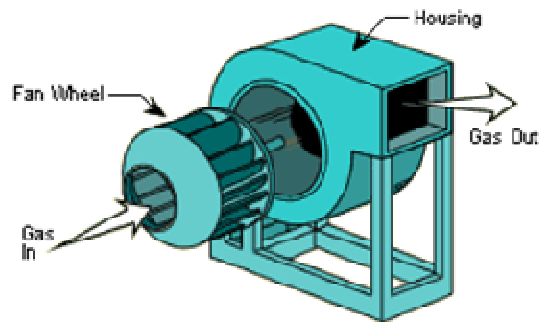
Centrifugal fan exploded view. (EPA 2010)
